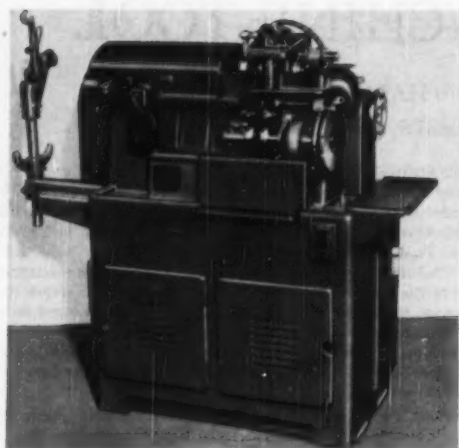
FABRICATED STEEL BASE ON AUTOMATIC PINION-TURNING MACHINE
